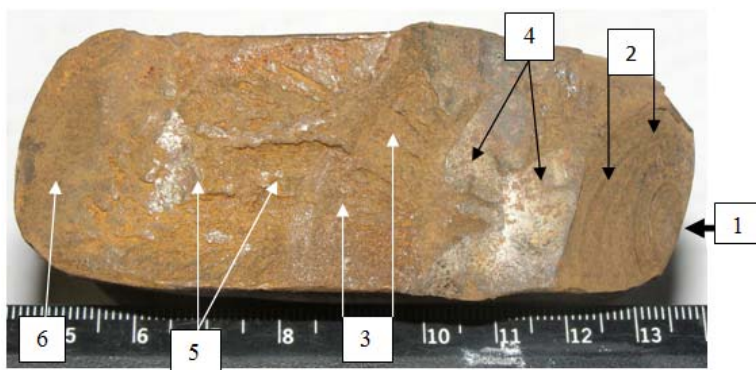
Fatigue fracture of the drawbar due to cyclic loading.
